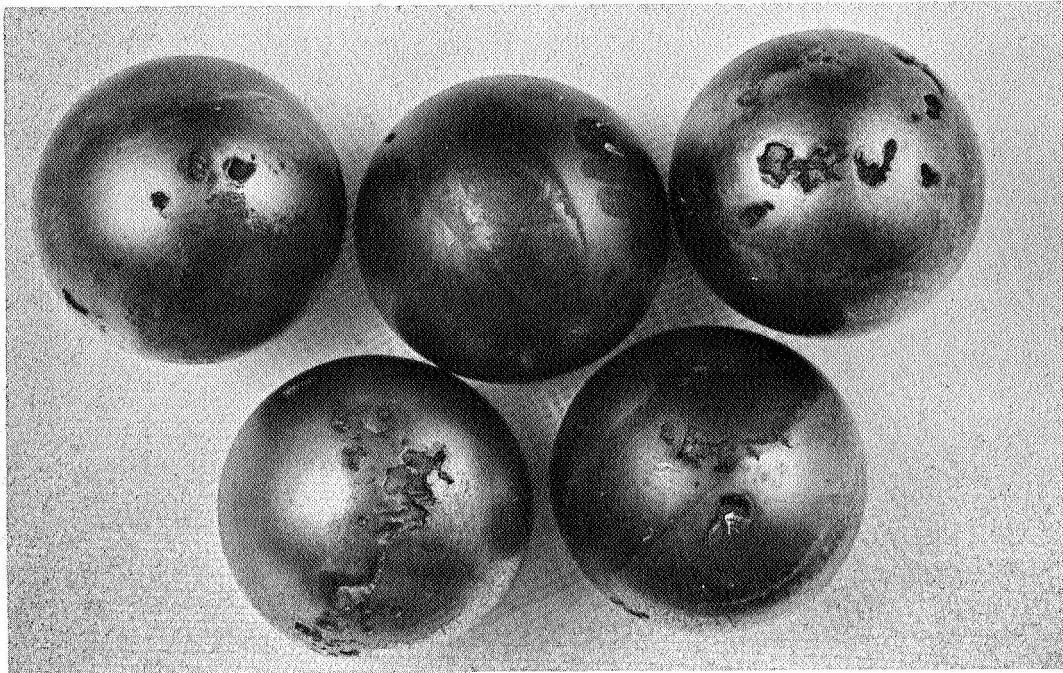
BALL FATIGUE FAILURES - BEARING S/N 52
